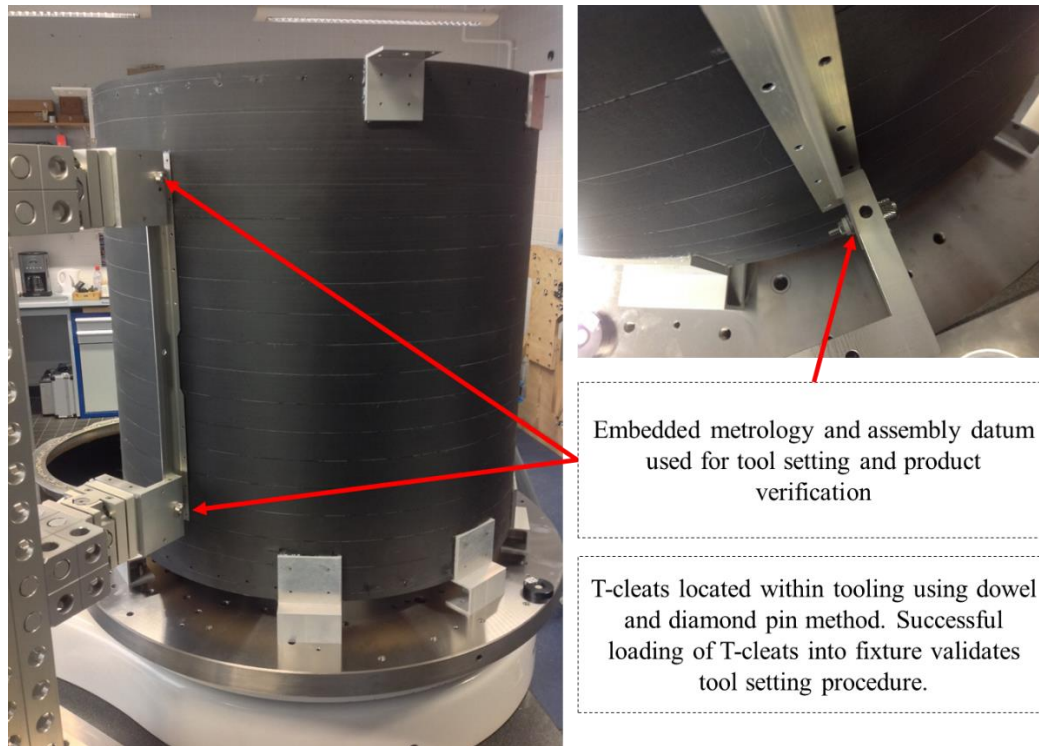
T-cleat tooling and assembly showing use of KCs directly measurable by laser tracker for enhanced verification and tool setting.
